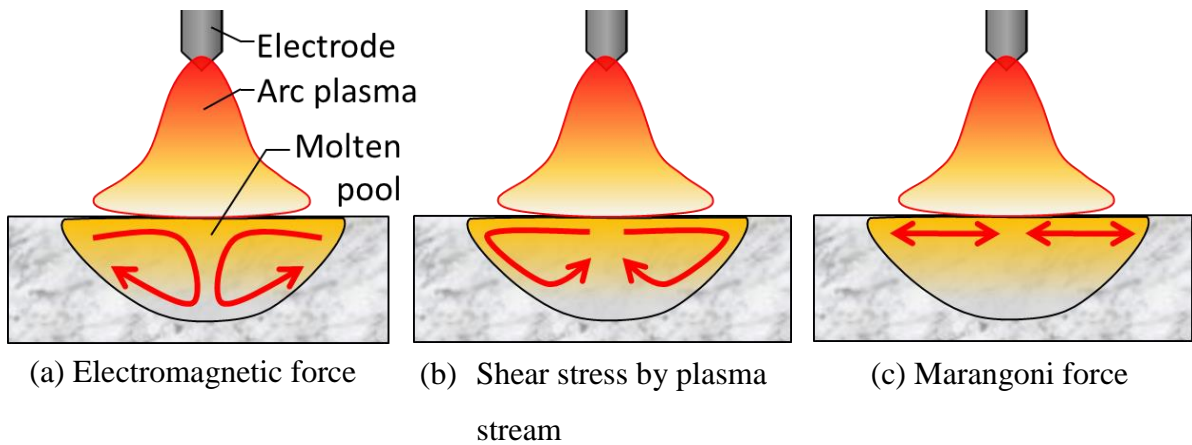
Driving forces of the convection in weld pool
